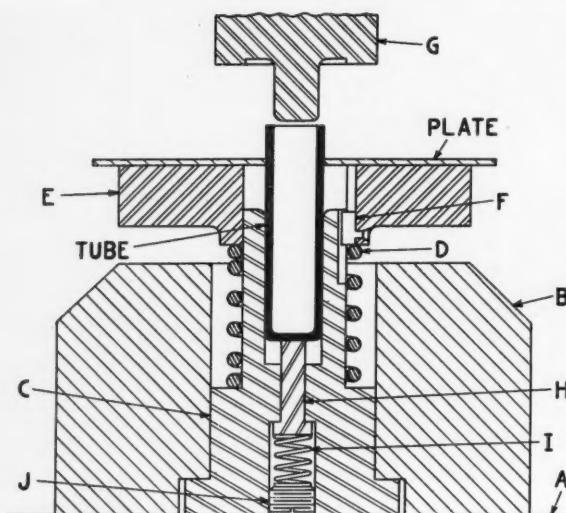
Drawing Illustrating Design of Simple Die for Clinching and Curling
